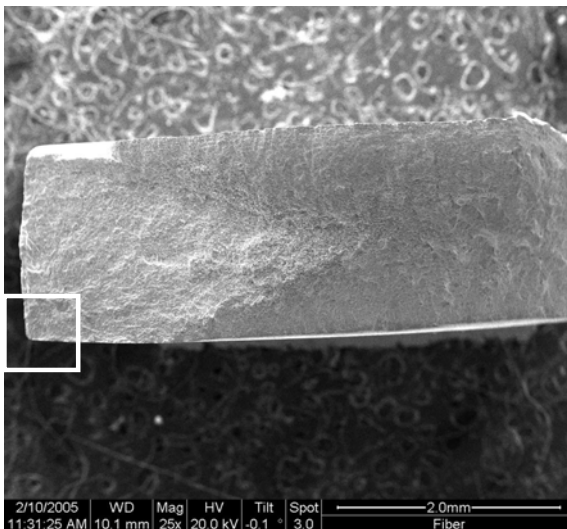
Specimen Ti-10, overall view of fracture surface
